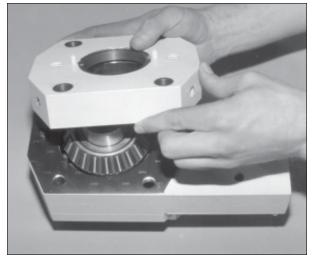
Align bolt holes and install top plate on gear drive box.
